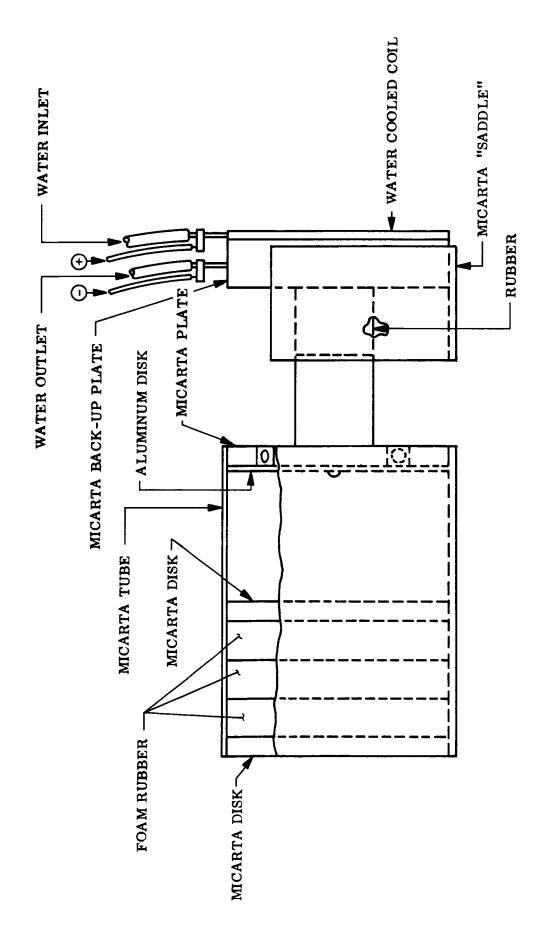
Cross Section of Compressed Air Coil Recoil Assembly
